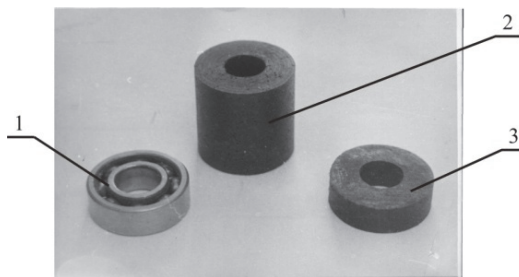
Bearings of the tank mounting unit for the washing machine to the housing:
